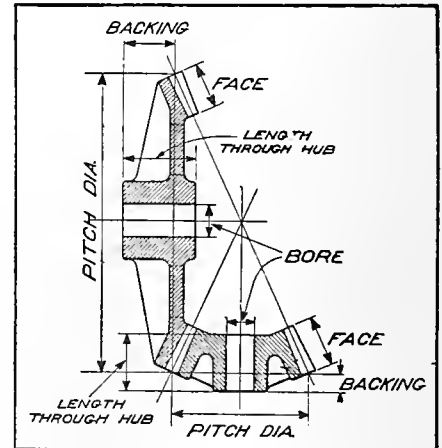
Cast tooth bevel and miter gears. —Bevel gears operate only in pairs, and it is first necessary to choose the correct ratio of driving to driven shafts, then determine the size of the shaft for small wheel. With this information at hand a suitable set of gears easily can be found to transmit a certain amount of horsepower under a given number of revolutions.
